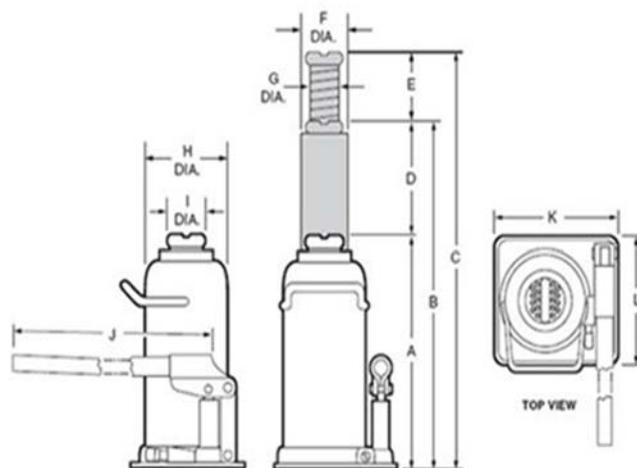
2D view of hydraulic bottle jacks (SGS, n.d.)
